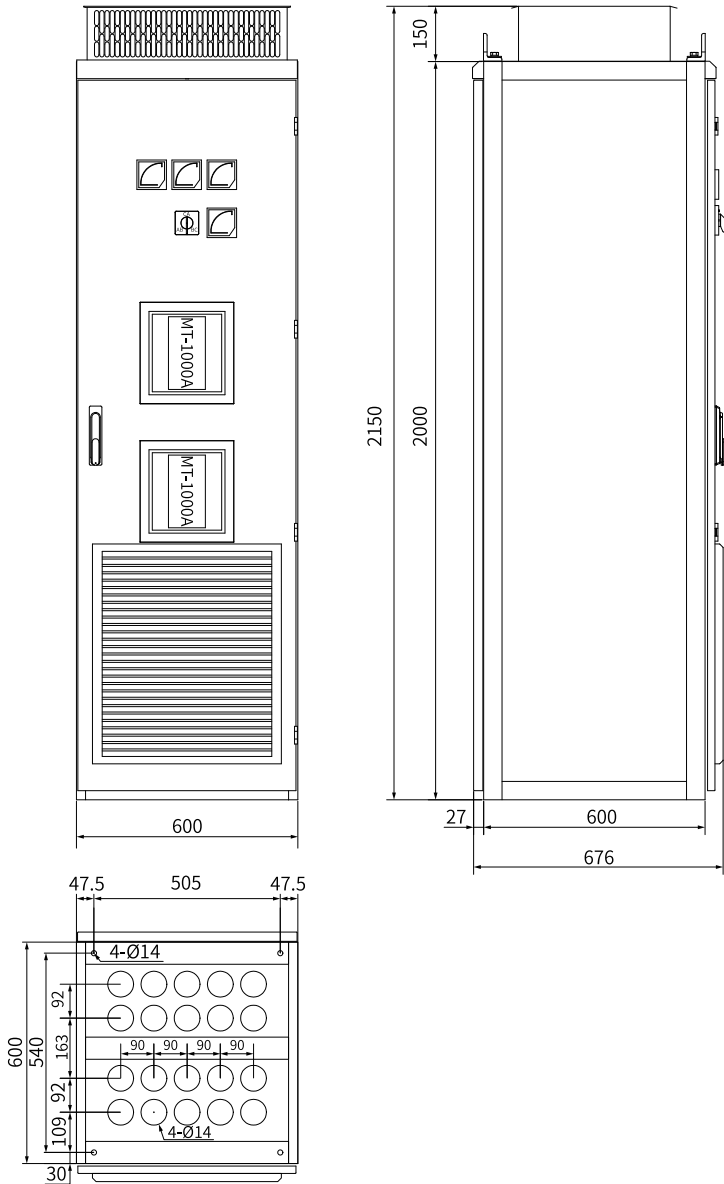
12-pulse 600-mm wide inlet cabinet (mm)
